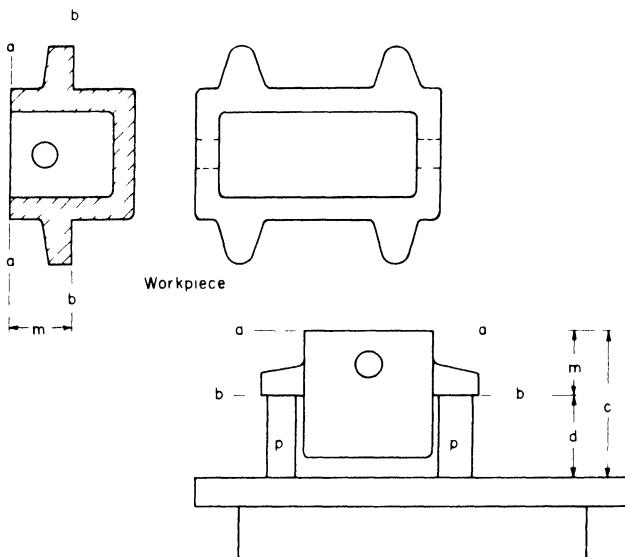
This use of a surface plate facilitates measuring dimension m of the casting.
